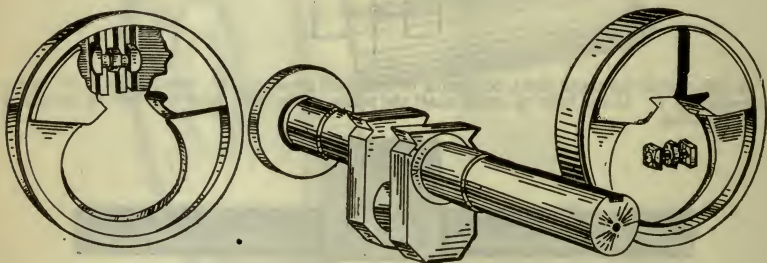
Crank shaft of the Erie engine having counterweights attached by transverse bolts.
